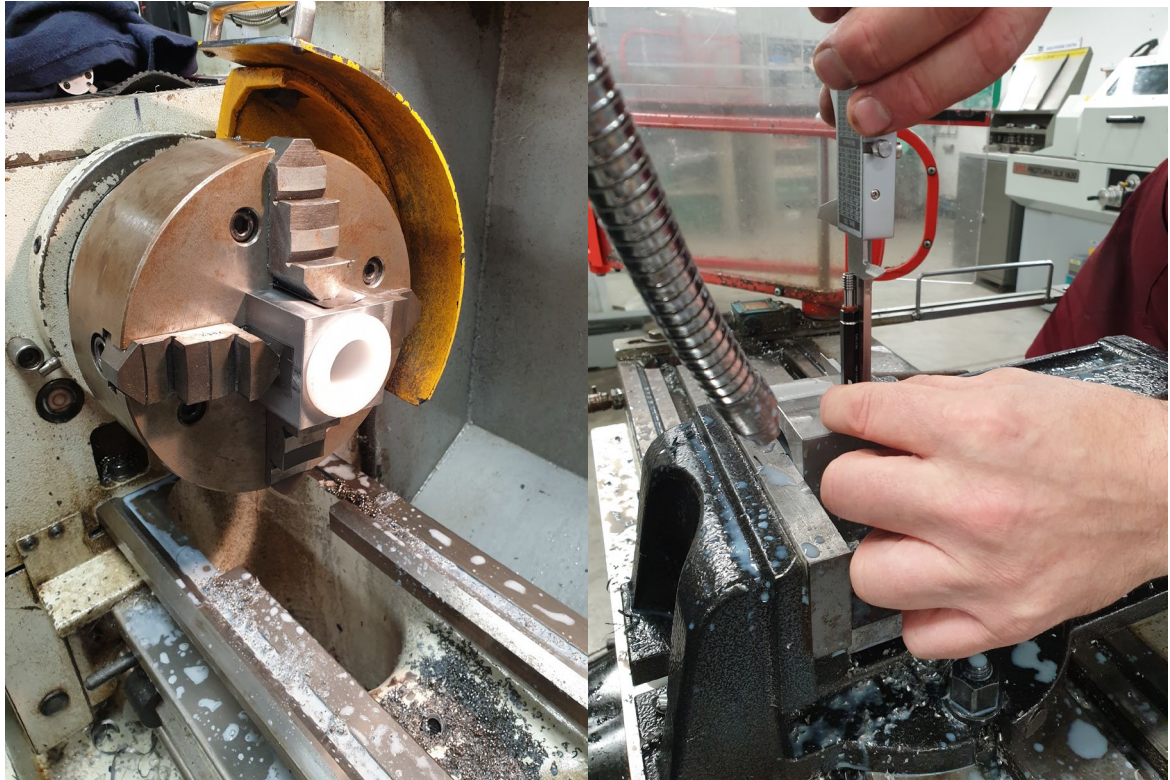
showing the drilled out hole to 28mm, swarf was consistently removed using safe methods. Boring bar tip was replaced before using it as it was worn.
